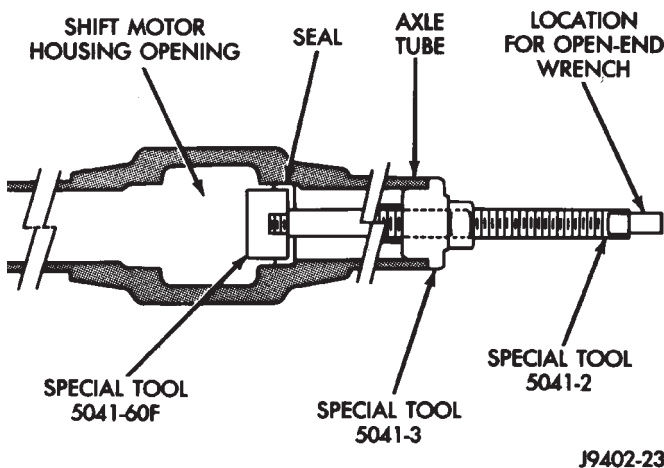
Inner Axle Seal Installation—248 FBI Axle
